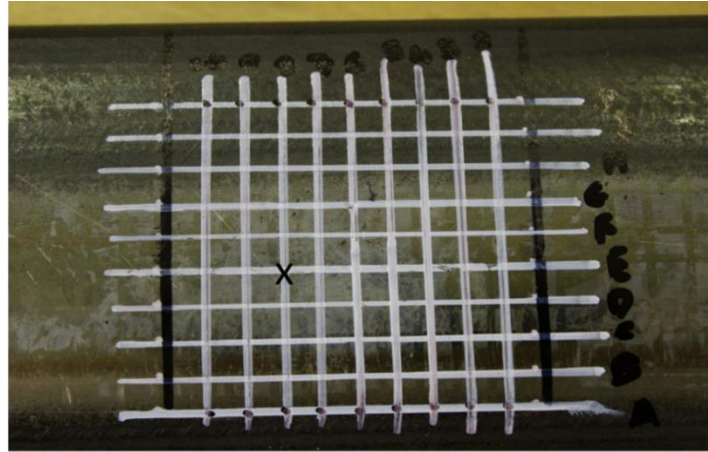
Sample C – Pitting and surface breaking crack with smallest internal defect size. 'X' marked the location of the internal defect.
